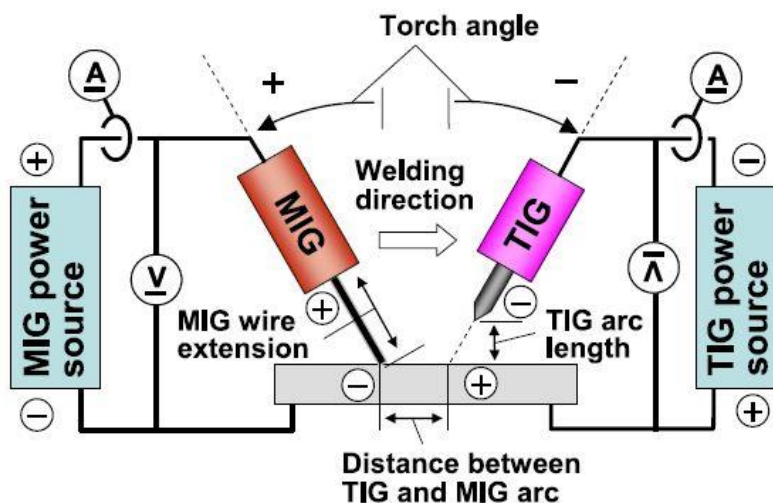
The TIG MIG hybrid welding process [3]
